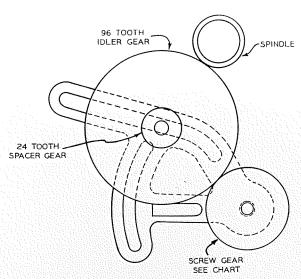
Gear set-up for 8 through 16 threads per inch.
